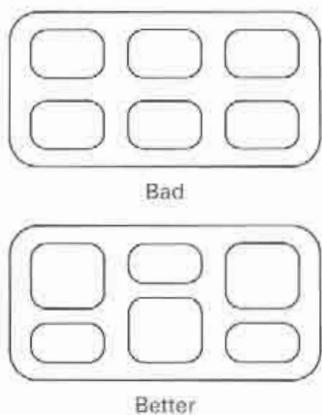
Using staggered ribs to prevent cracking during cooling.
